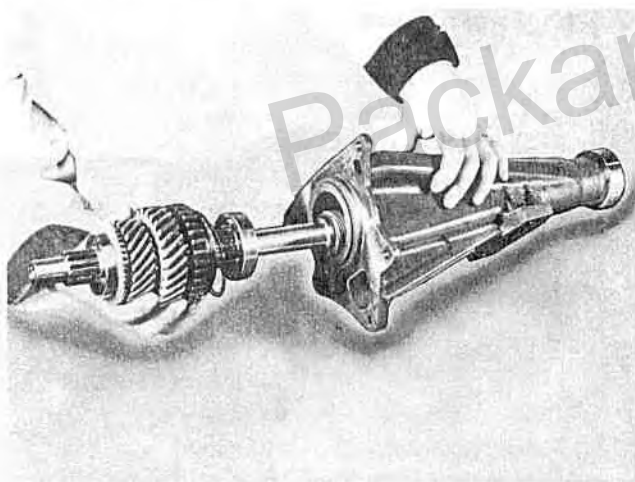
Removing the Main Driving Shaft From the Rear Housing
